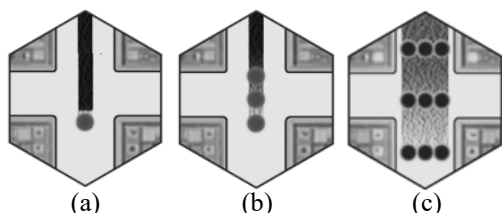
Examples of laser beam patterns in a dicing street. a) Single beam, b) multibeam in-line, c) advanced multibeam.
